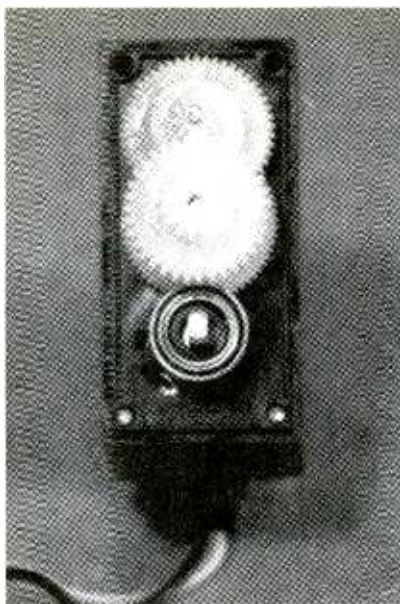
The servo geartrain is shown here, with the bull gear removed. Note that the clip is off the potentiometer shaft and the shaft is aligned lengthwise.
